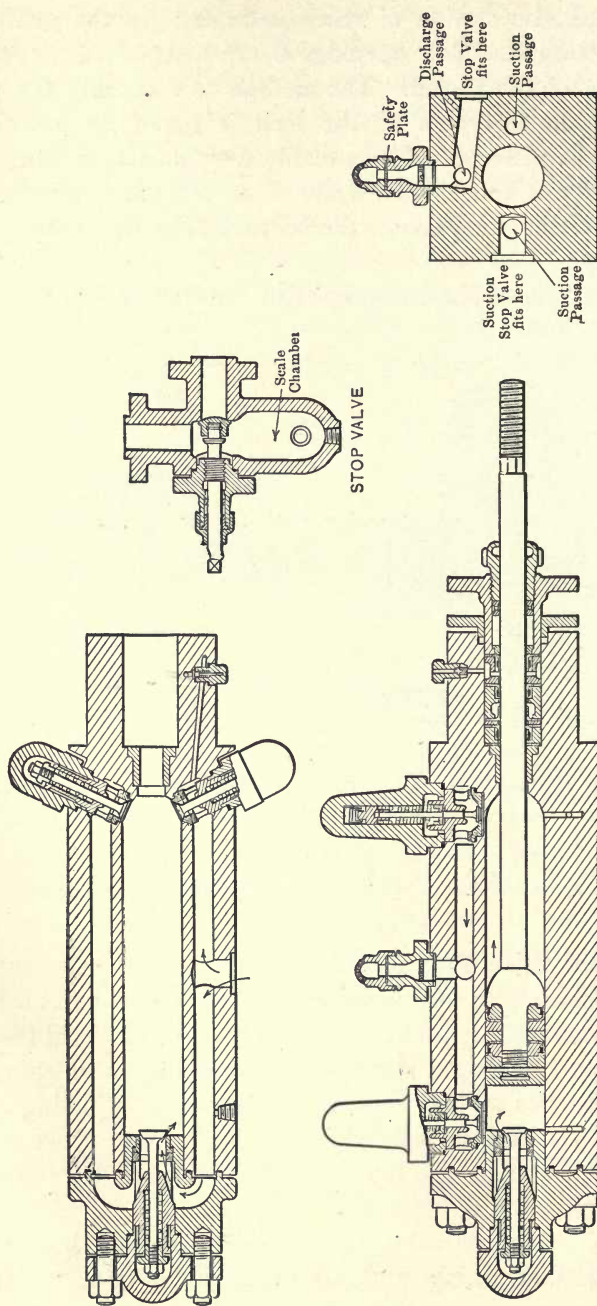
Valves of the Triumph Ice Machine Co. Compressor.
